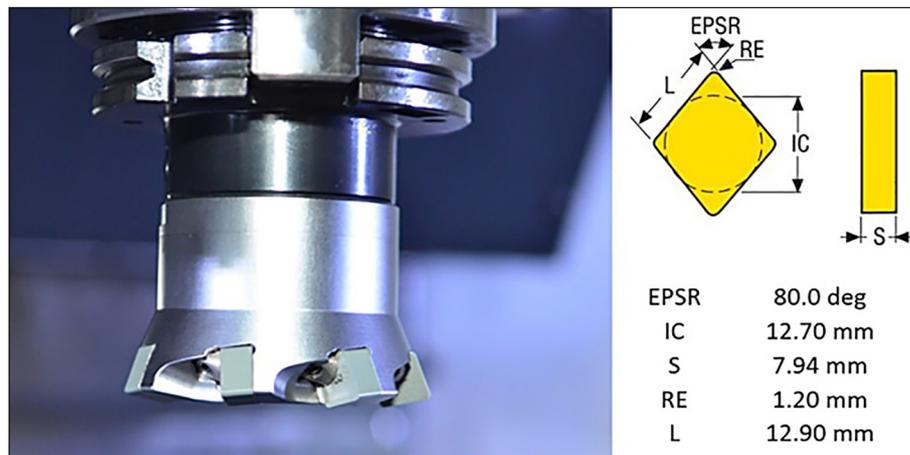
Designed milling head with CNGN120712 inserts, mounted in the spindle of the milling center
